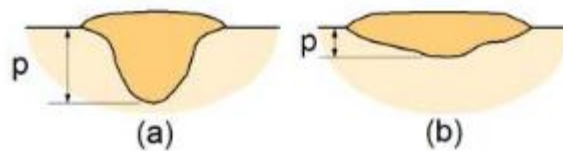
Effect of changes in welding parameters on the geometry of weld beads deposited with a welding energy of approximately 1.8 kJ/mm (schematic) (3..3). Welding conditions: (a) 800 A, 26 V and 12 mm/s and (b) 125 A, 26 V and 1.7 mm/s (MODENESI; MARQUES; SANTOS, 2012).
